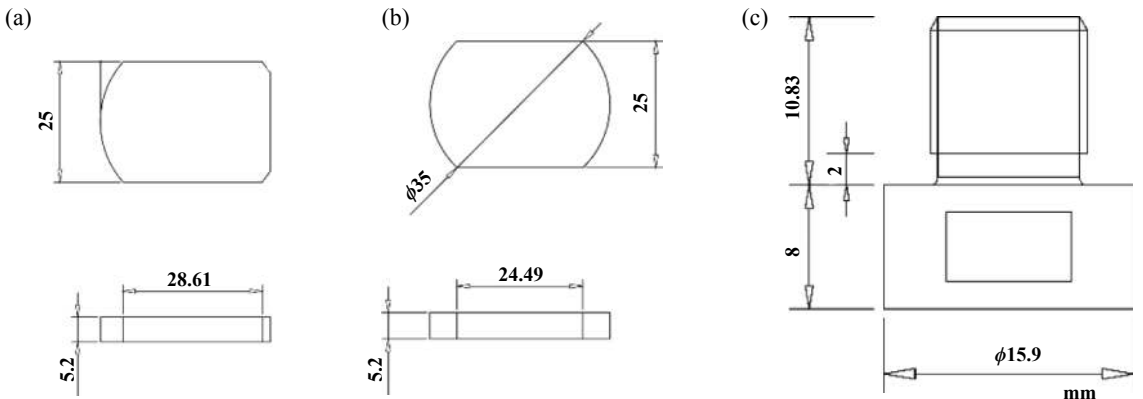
Shape and size of test specimens (a) 316L, (b) Inconel 718 and (c) vibration specimen
